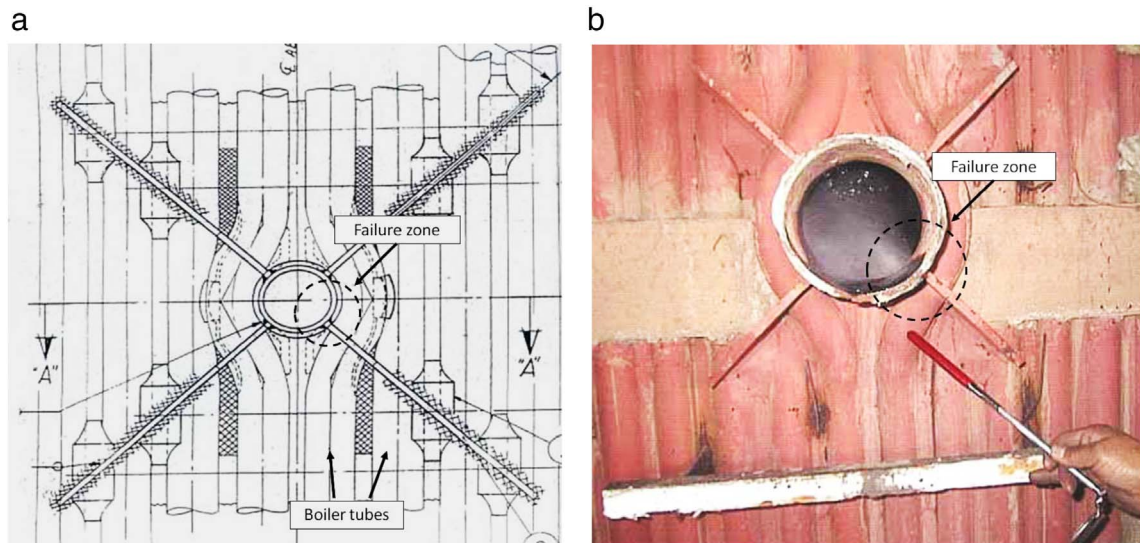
(a) Schematic drawing of the water-tube boiler showing failure zone and (b) macrograph of the water-tube boiler showing crack zone in the wall tube.
